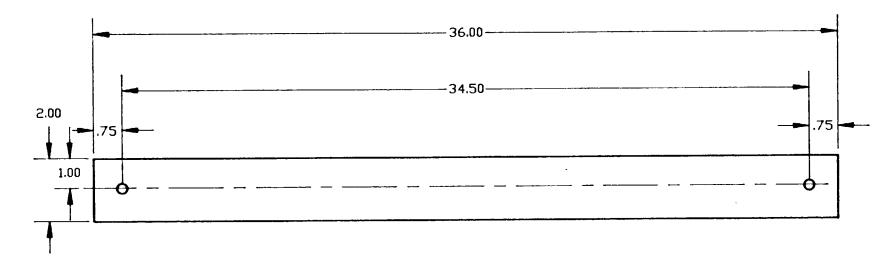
Tool Box Rack Assembly Part Number 20089720-10 (Sheet 10 of 11)
